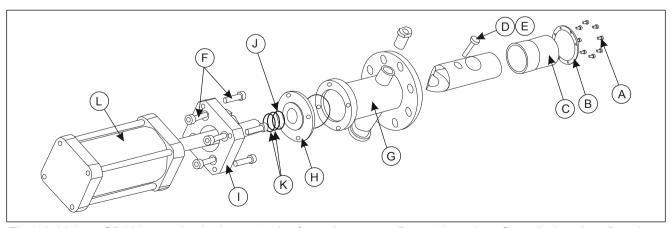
Valmet SD501 sampler body, parts: A - fastening screw, B - retainer ring, C - cylinder pipe, D - piston locking screw, E - spring washer, F - Allen screw, G - sampler body, H - sealing element, I - cylinder fitting, J - wiper, K - piston shaft gasket, L - cylinder.
